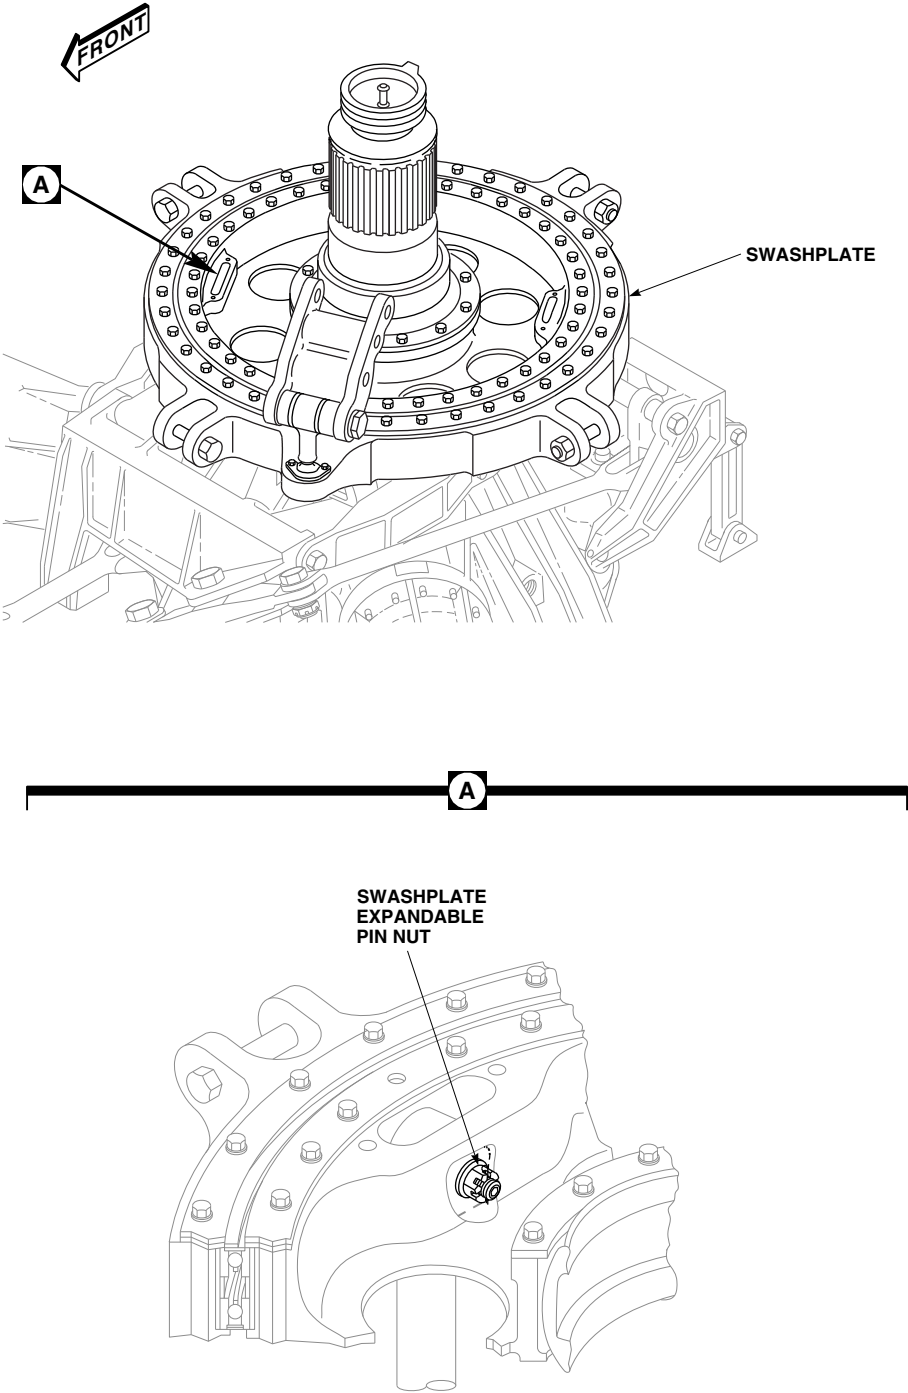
INSPECT SWASHPLATE SCISSORS ATTACHMENT SPHERICAL BEARINGS
